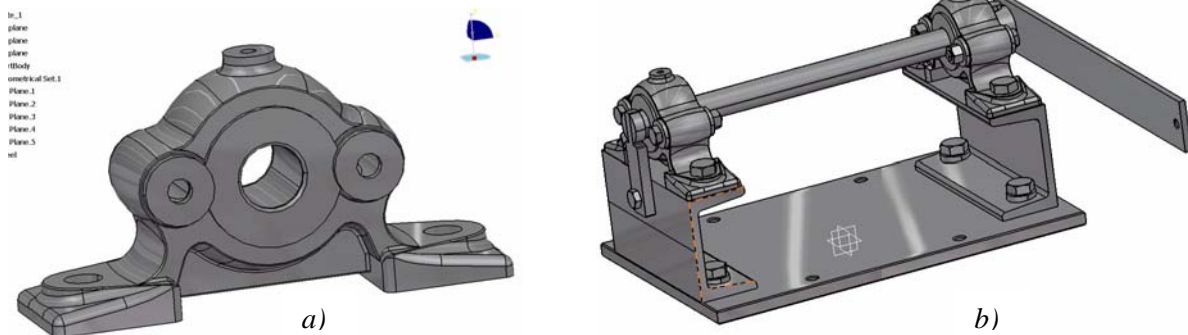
Examples of solid modeling - CATIA V5: a) part design, b) assembly design
